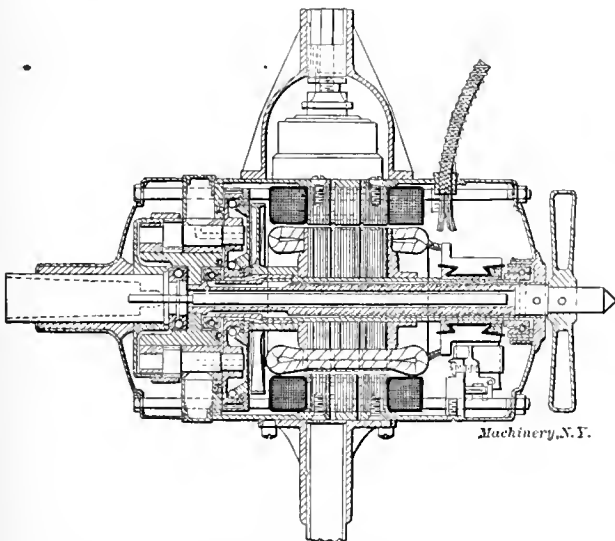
Section through Drill, showing Use of Ball Bearings and the Provision for Cooling the Commutator, Armature and Field.
